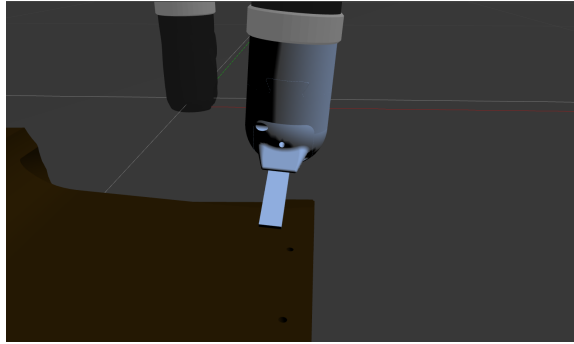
Polishing tool and steel mold in Gazebo.
